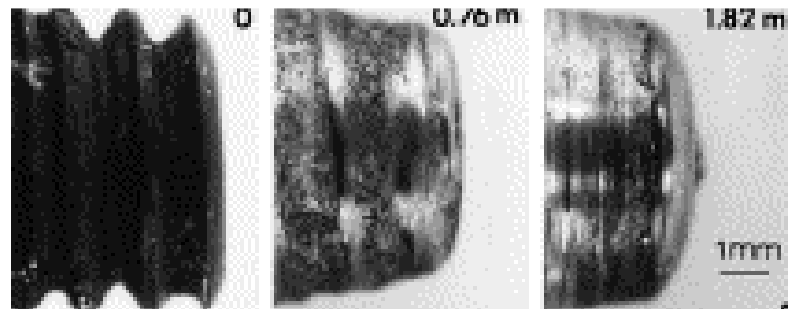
Images from Prado et al. showing shape changes in steel FSW tool for two successive welds of Al 6061/Al₂O₃/20p. Parameters are 500 RPM and 1 mm/s and each weld was 0.76 m in length [43].
